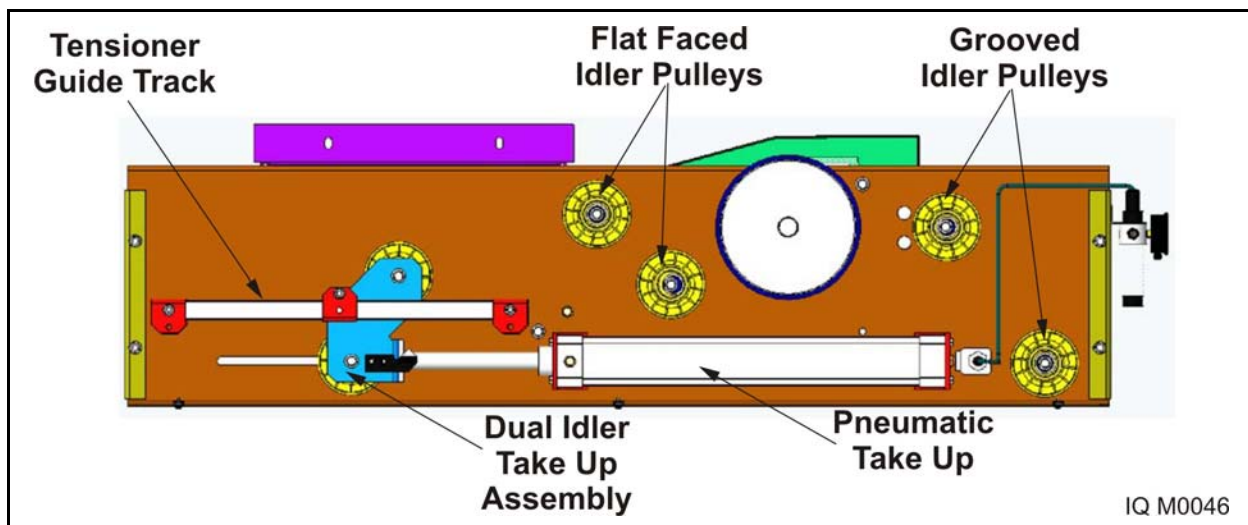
54 Drive Section (drive cover removed for clarity)
